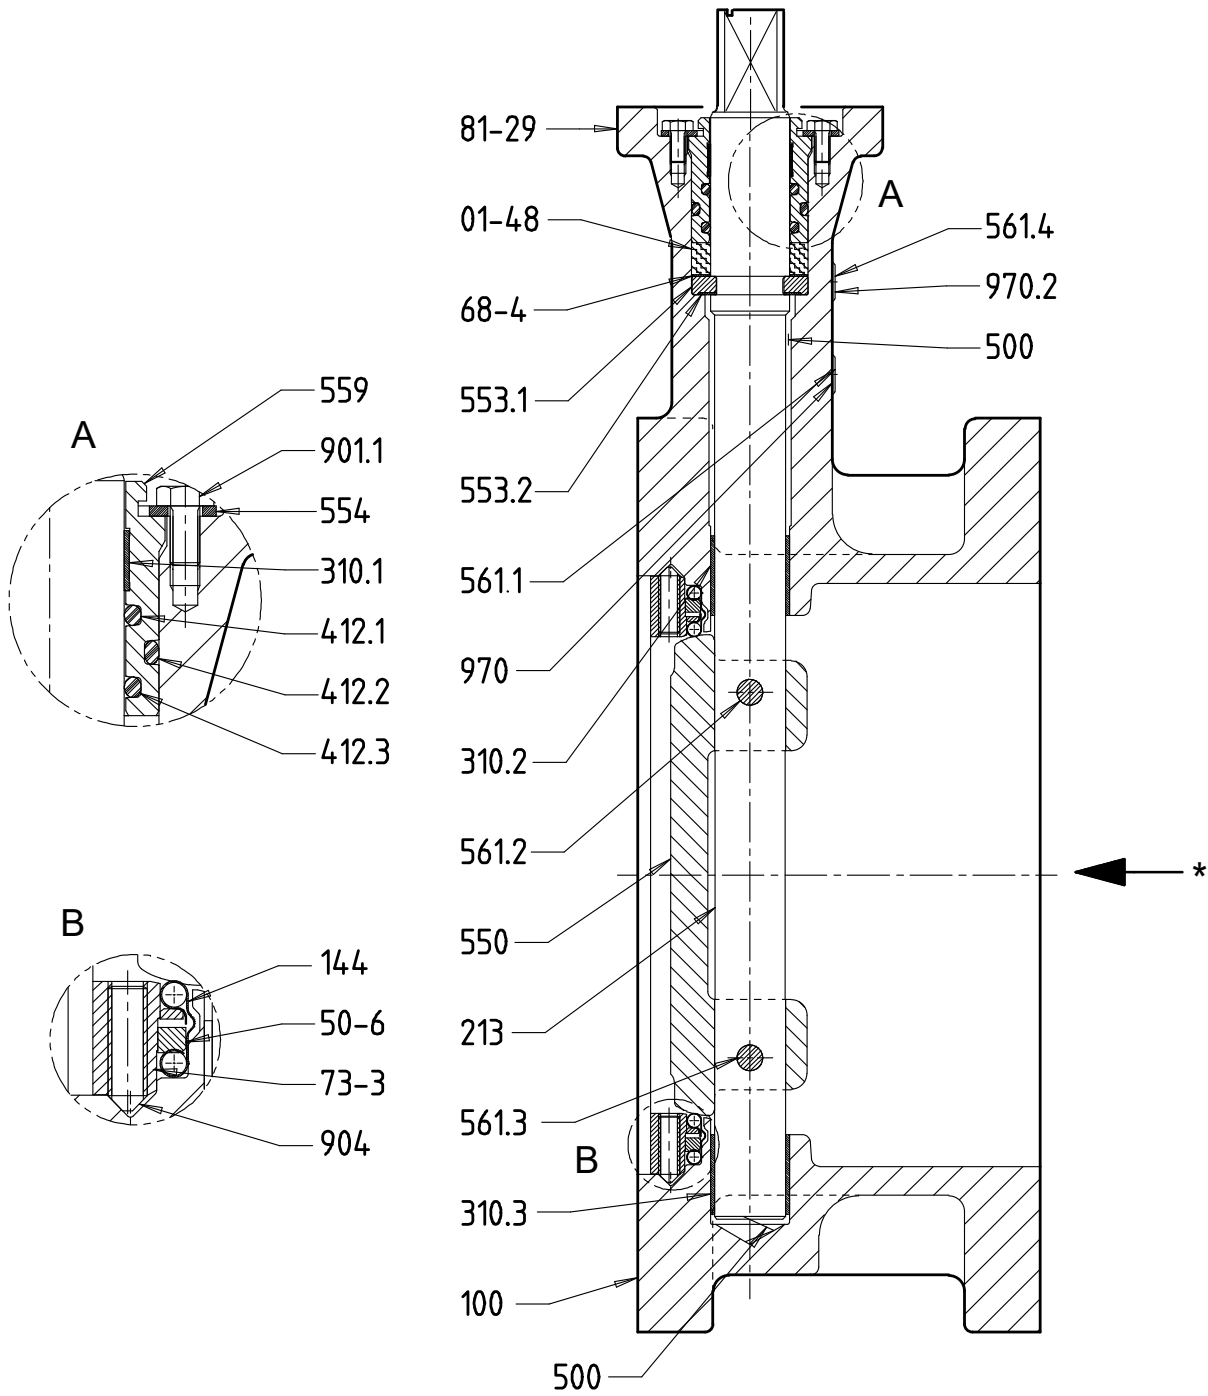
Part from bearing spare parts kit TRIODIS 150 MT T7 - DN 50-150 (2-6 inch)
